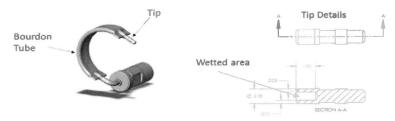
C-type Bourdon Tube Assembly with Tip Details
